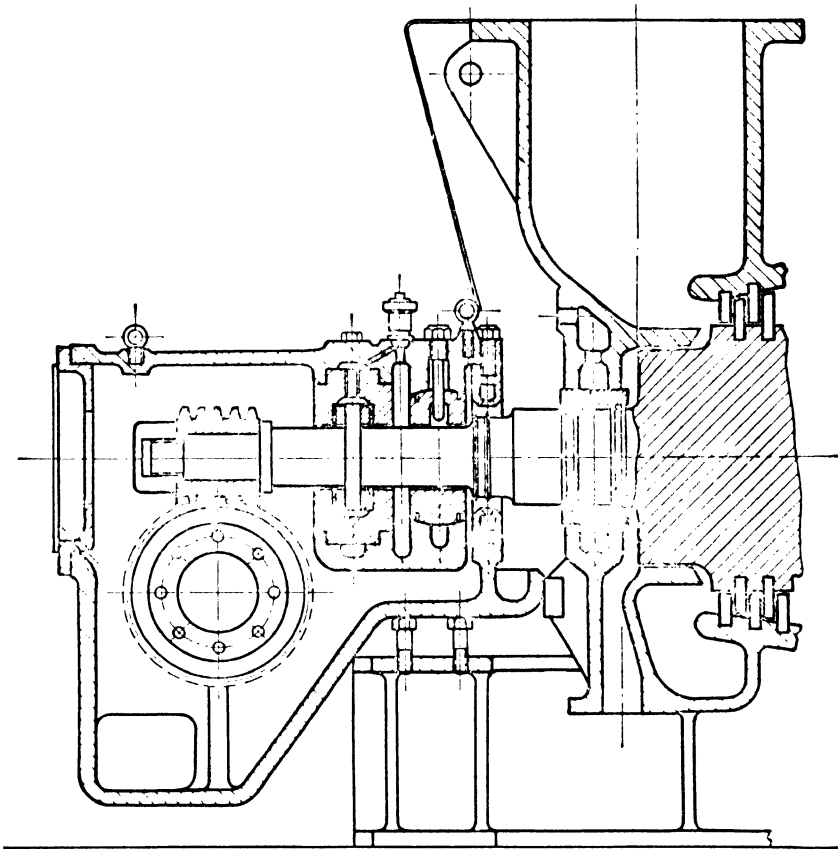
Thrust bearing for gas turbine, by C. A. Parsons & Co., Ltd.; see Ref. V, 7
